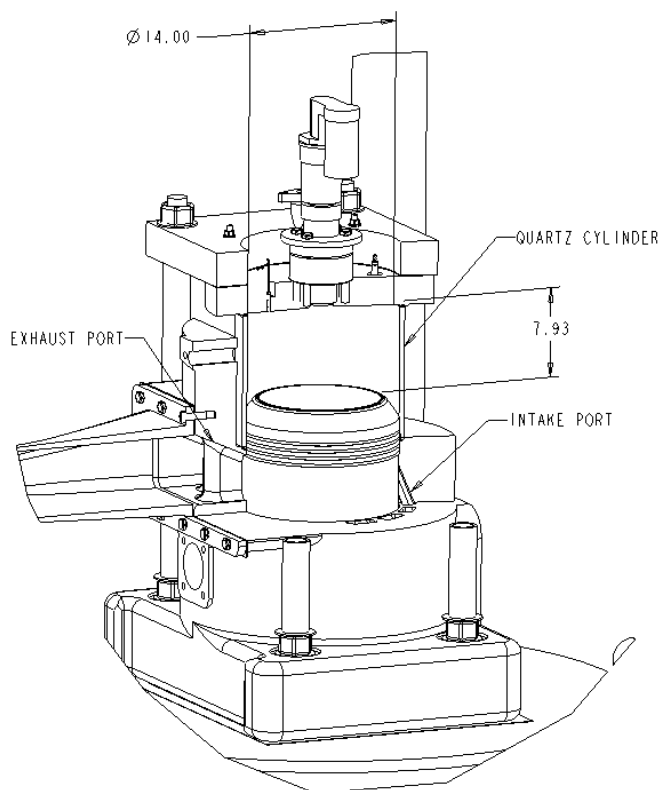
Three dimensional cut-away drawing of optical engine (dimensions in inches).
